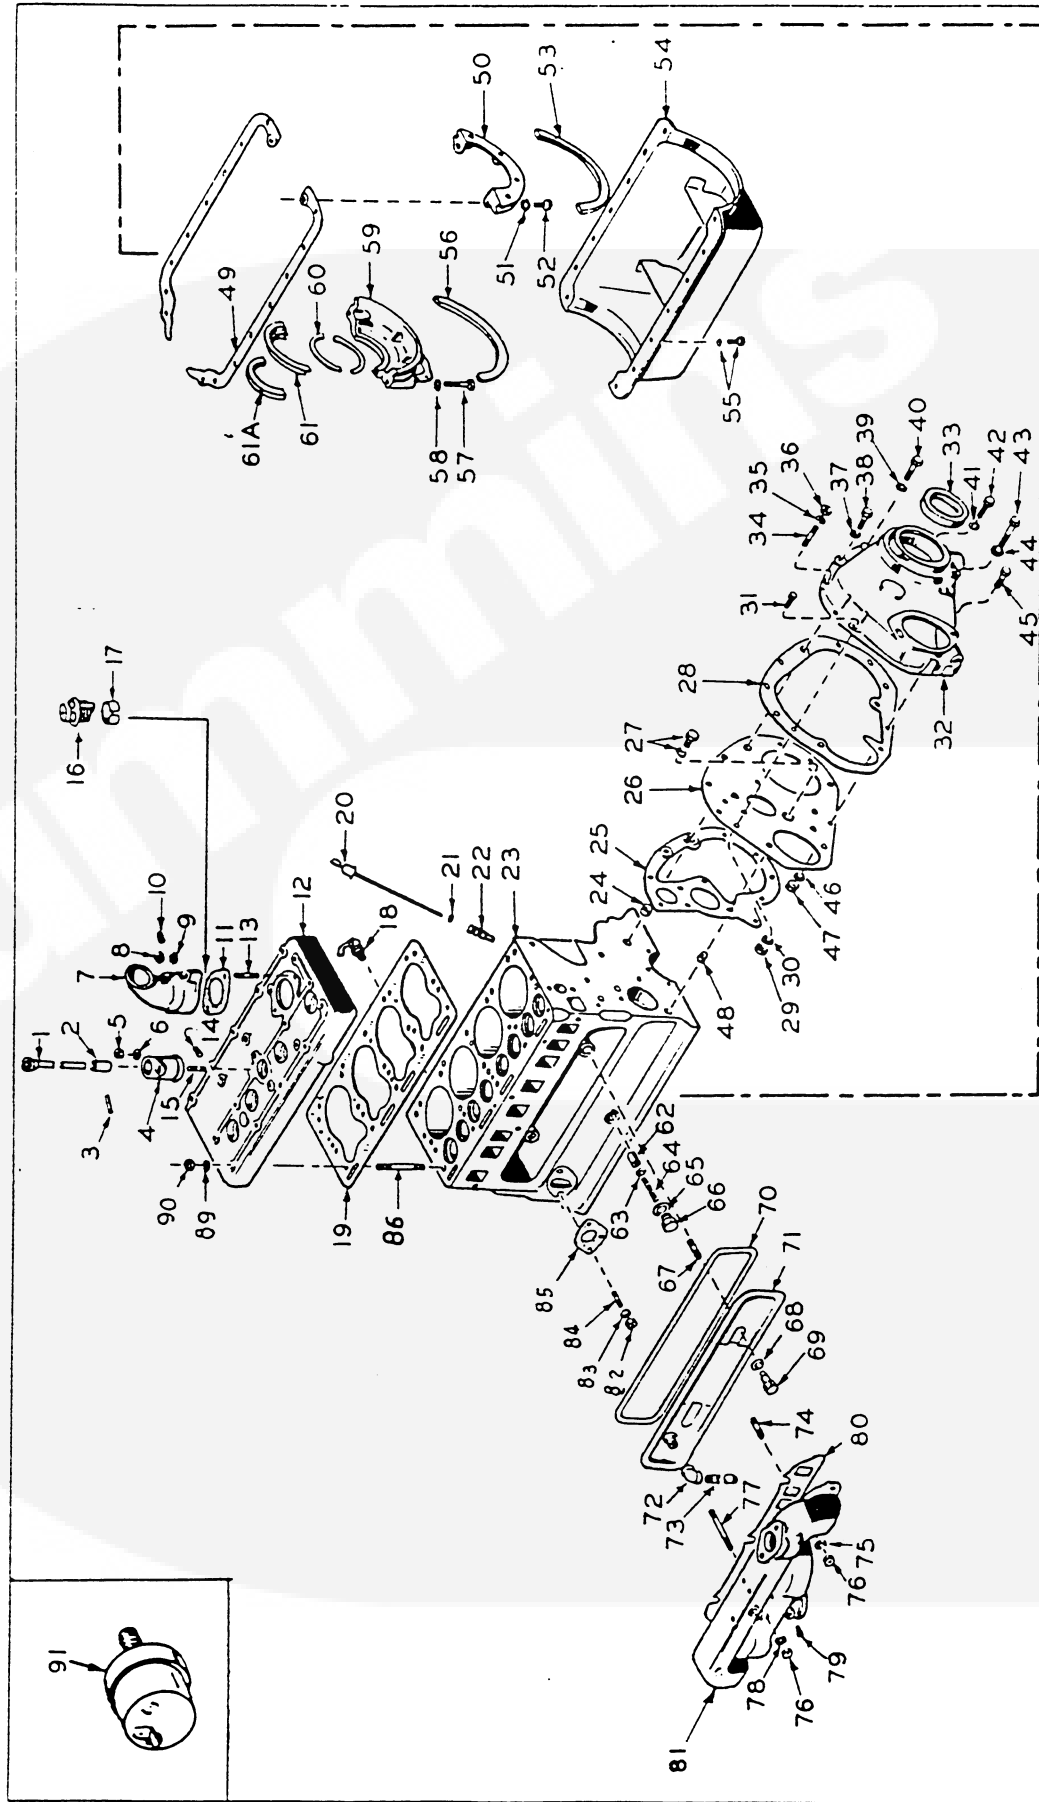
EXTERNAL VIEW ENGINE PARTS GROUP
